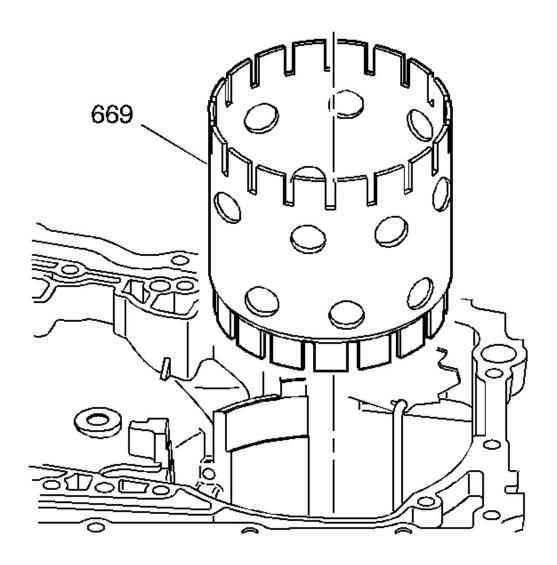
View Of Reverse Reaction Drum Courtesy of GENERAL MOTORS CORP.
